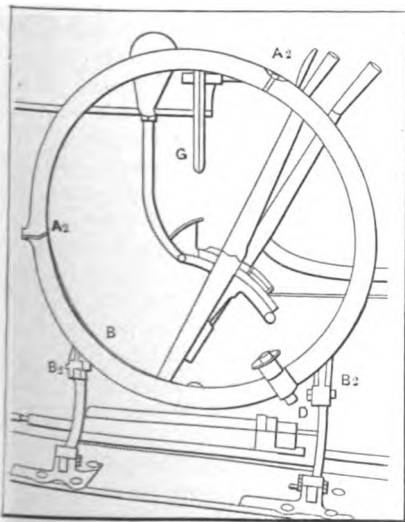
Dunlop demountable-rim carrier. Pins A₁ and D on outer aluminum ring casting, support rim. Inner casting B₁ held to running-board by swing brackets B₂, and to body by shorter swing link G
